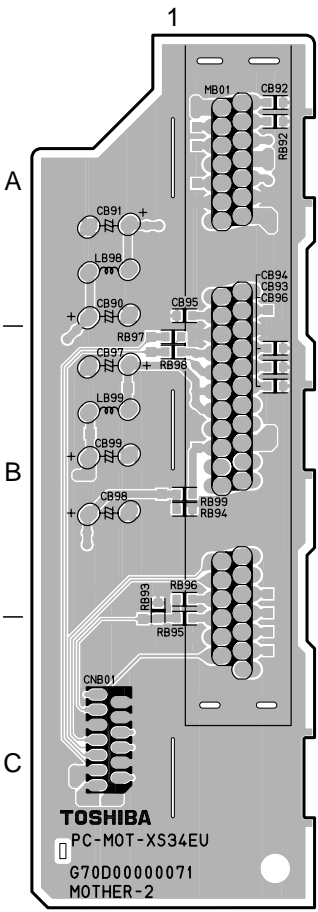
EU82 Tuner Unit PC Broad (Bottom side)
